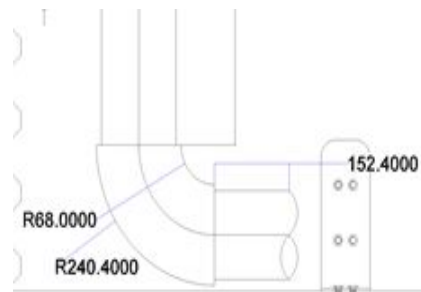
Outlet Part of the Inlet Pipe Component of the Tank
